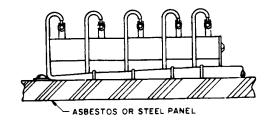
Resistors — Tube Type — Bracket Mounted — Cable Against Panel — No. 14 Gauge and Smaller Wires
